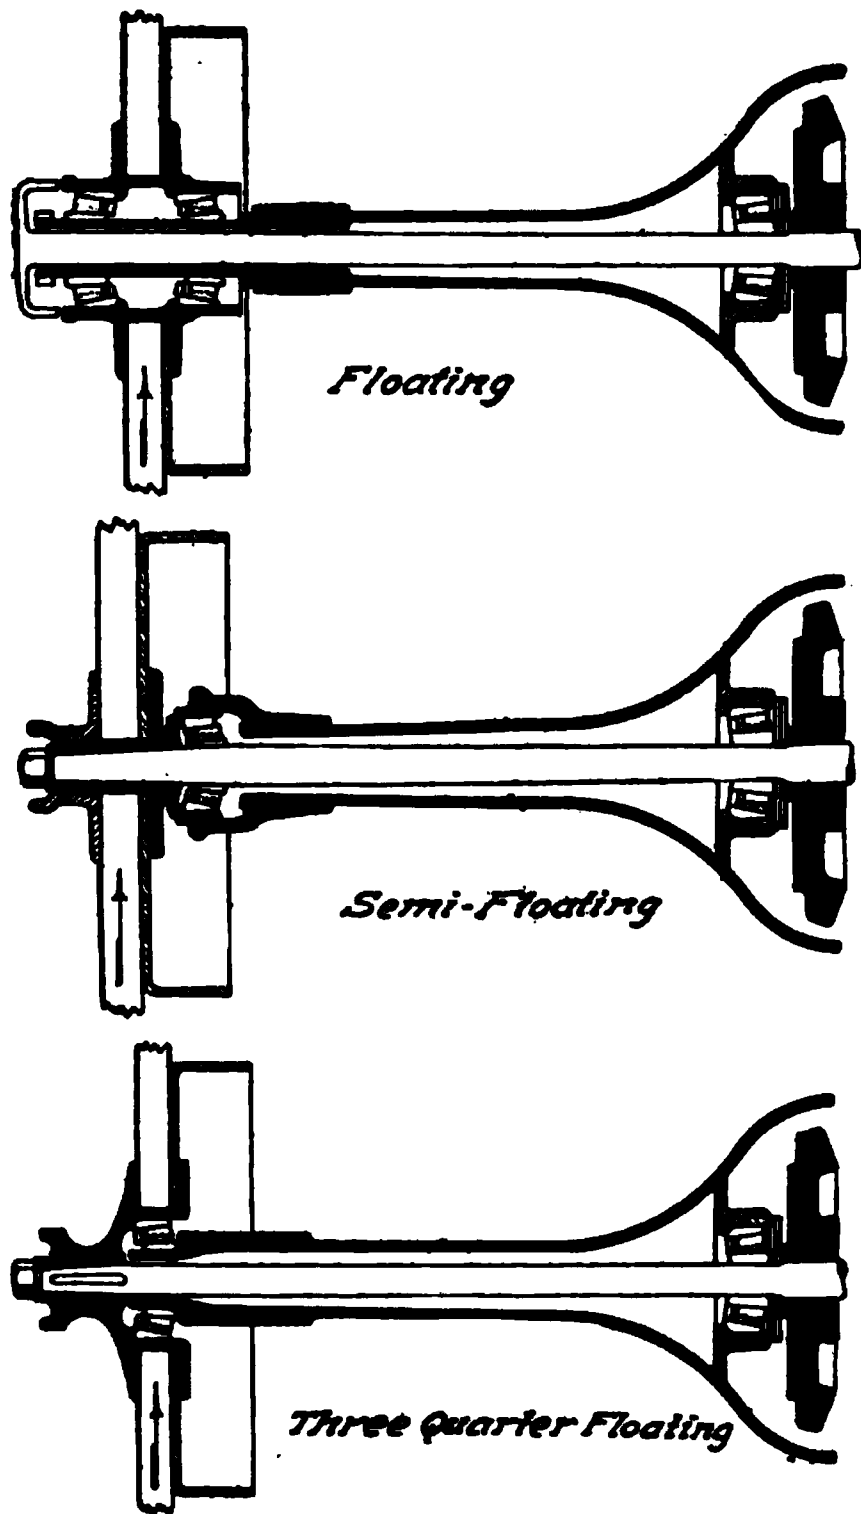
Arrangement of Axle Bearings and Housing in Three Principal Forms of Rear Axle
